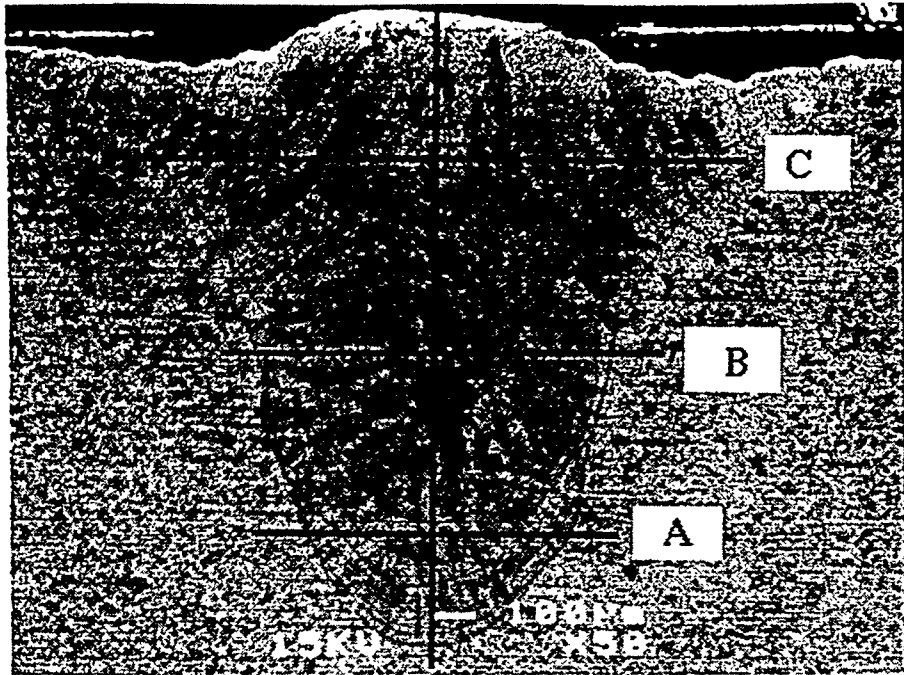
Hardness profiles at several elevations indicated in photomicrograph for laser-welded V-4Cr-4Ti specimen after post-welding treatment, designated as Weld 1H in Tables 1 and 6.
